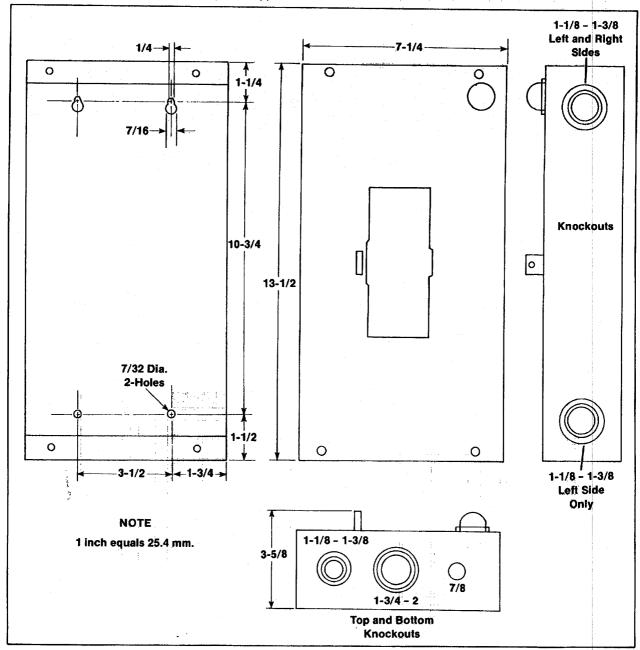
100/60 Amp. Transfer Switch Mounting and Overall Dimensions
